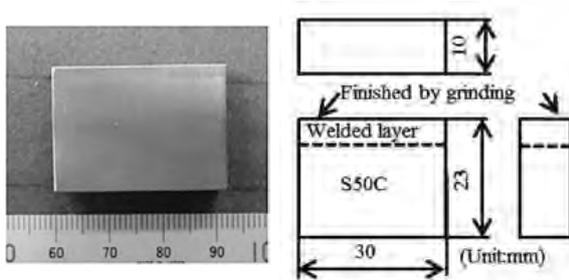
Example of finished specimen for hot wear resistance test and geometry
